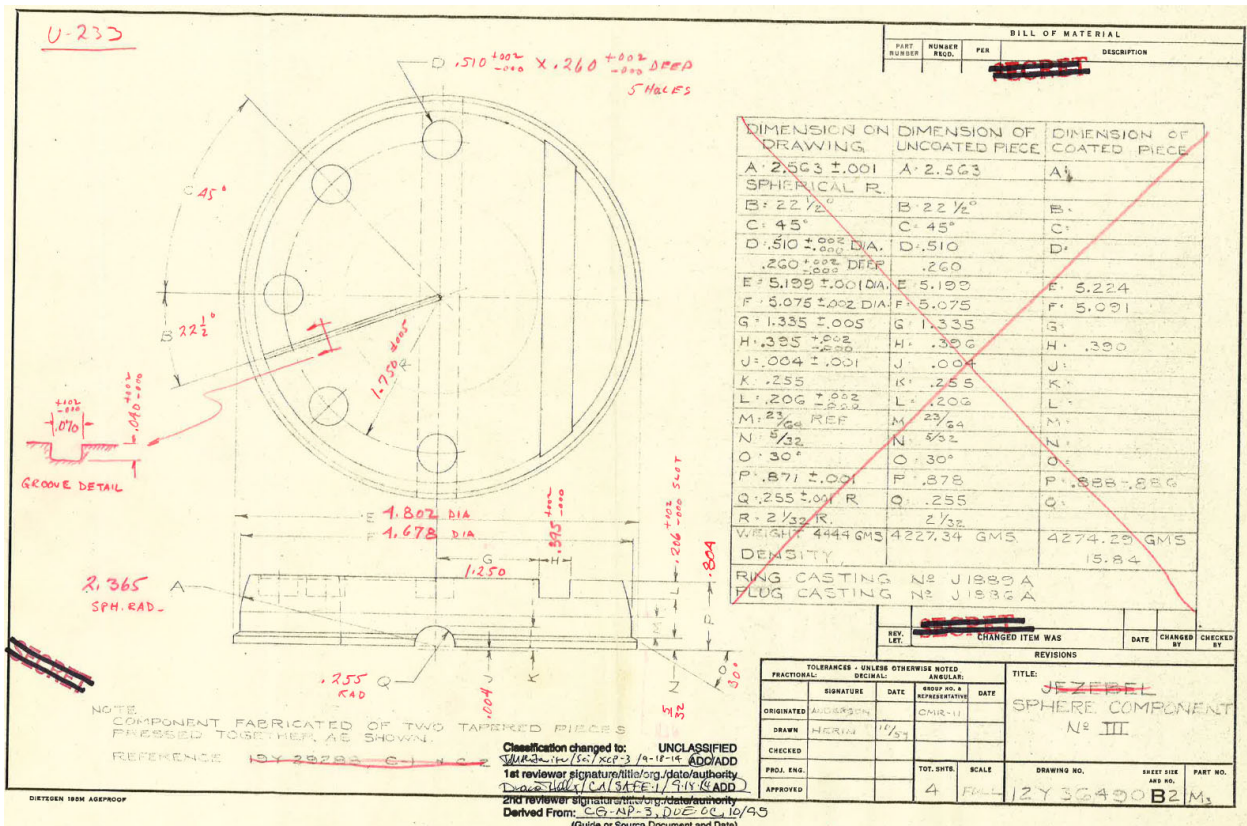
"Jezebel Sphere Component No. III," Drawing 12Y36490 B2, October 1954.
